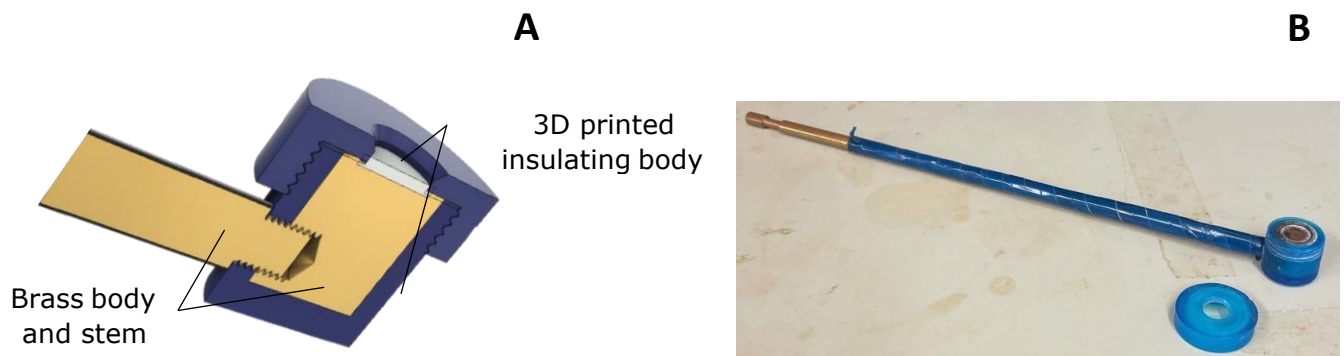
(A) Cross-sectional 3D model of purpose designed flat specimen holder (B) Physical flat specimen holder used in testing
